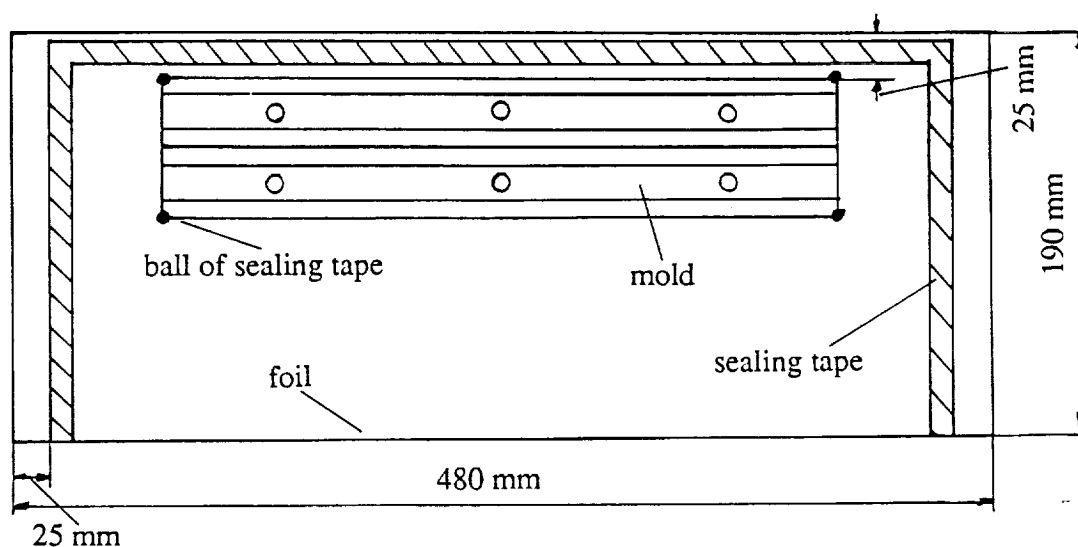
Illustration of vacuum bagging - step 4 (top view).
